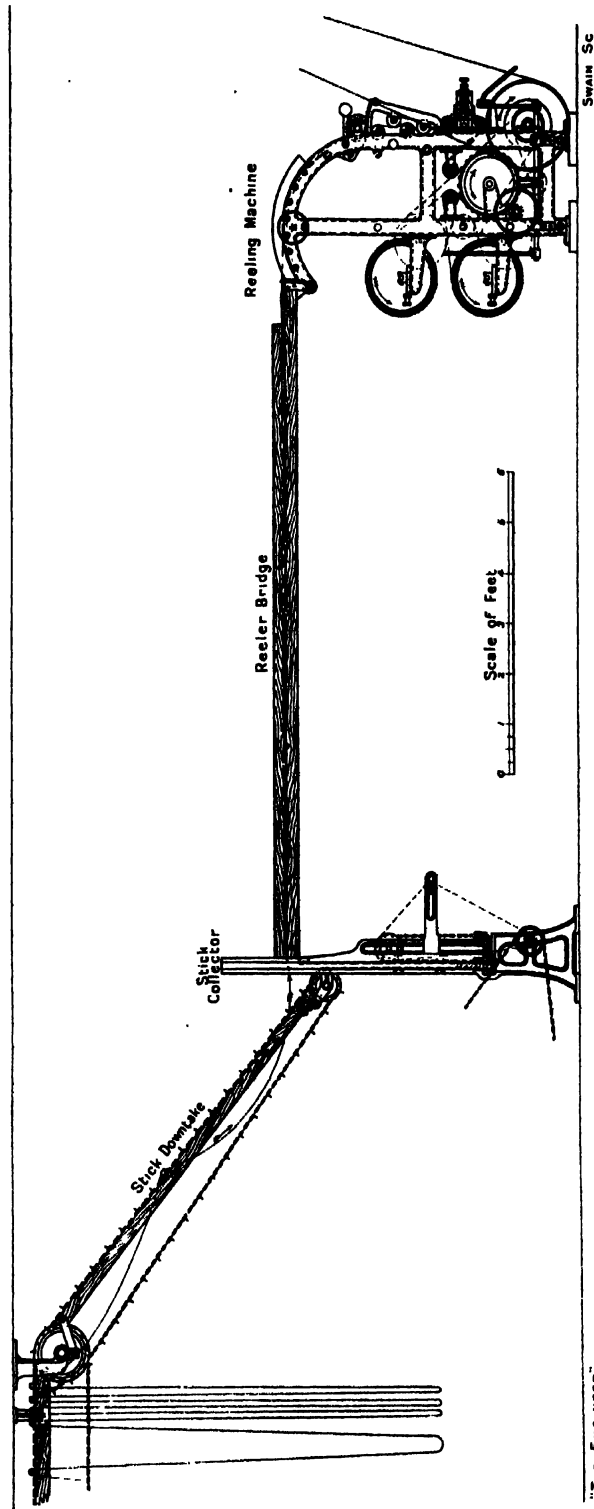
Downtake End of Trackway and Reeling Machine.
